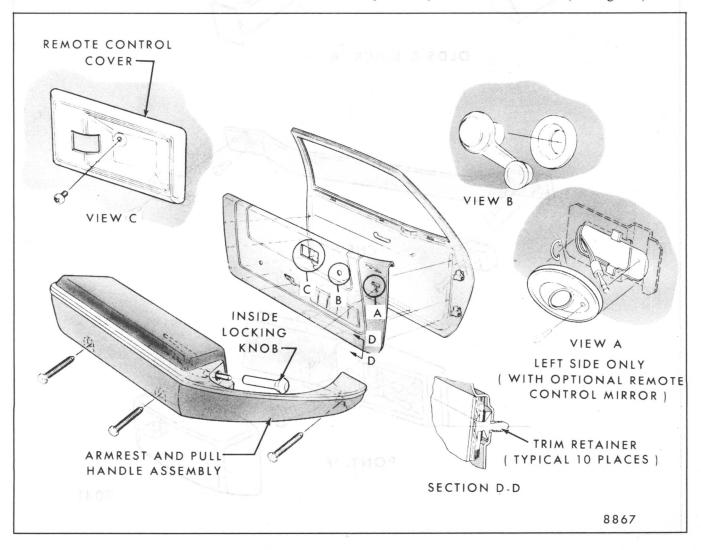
Door Armrest and Pull Handle - Typical Attachment for "F, H and X" Styles
